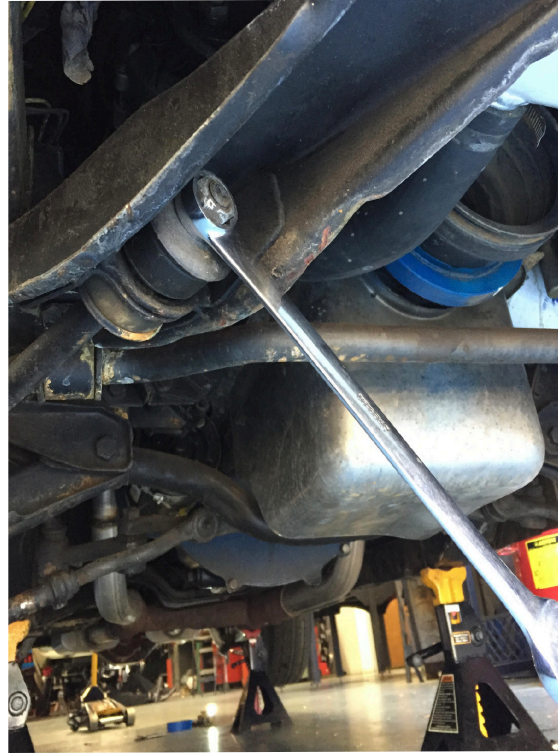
Showing the stock strut rod being unbolted from the chassis.
